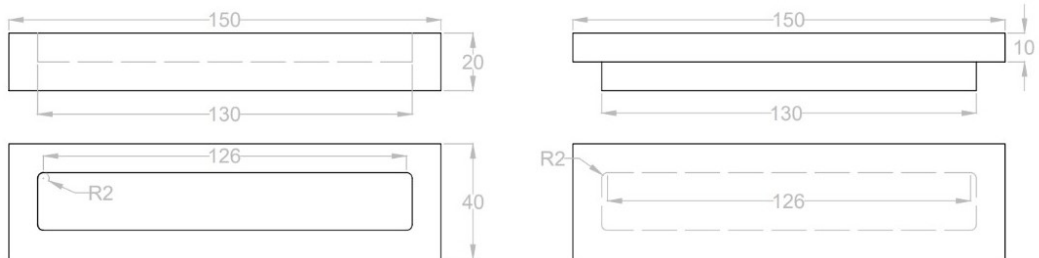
Project parameters of the moulds. Dimensions in mm.
